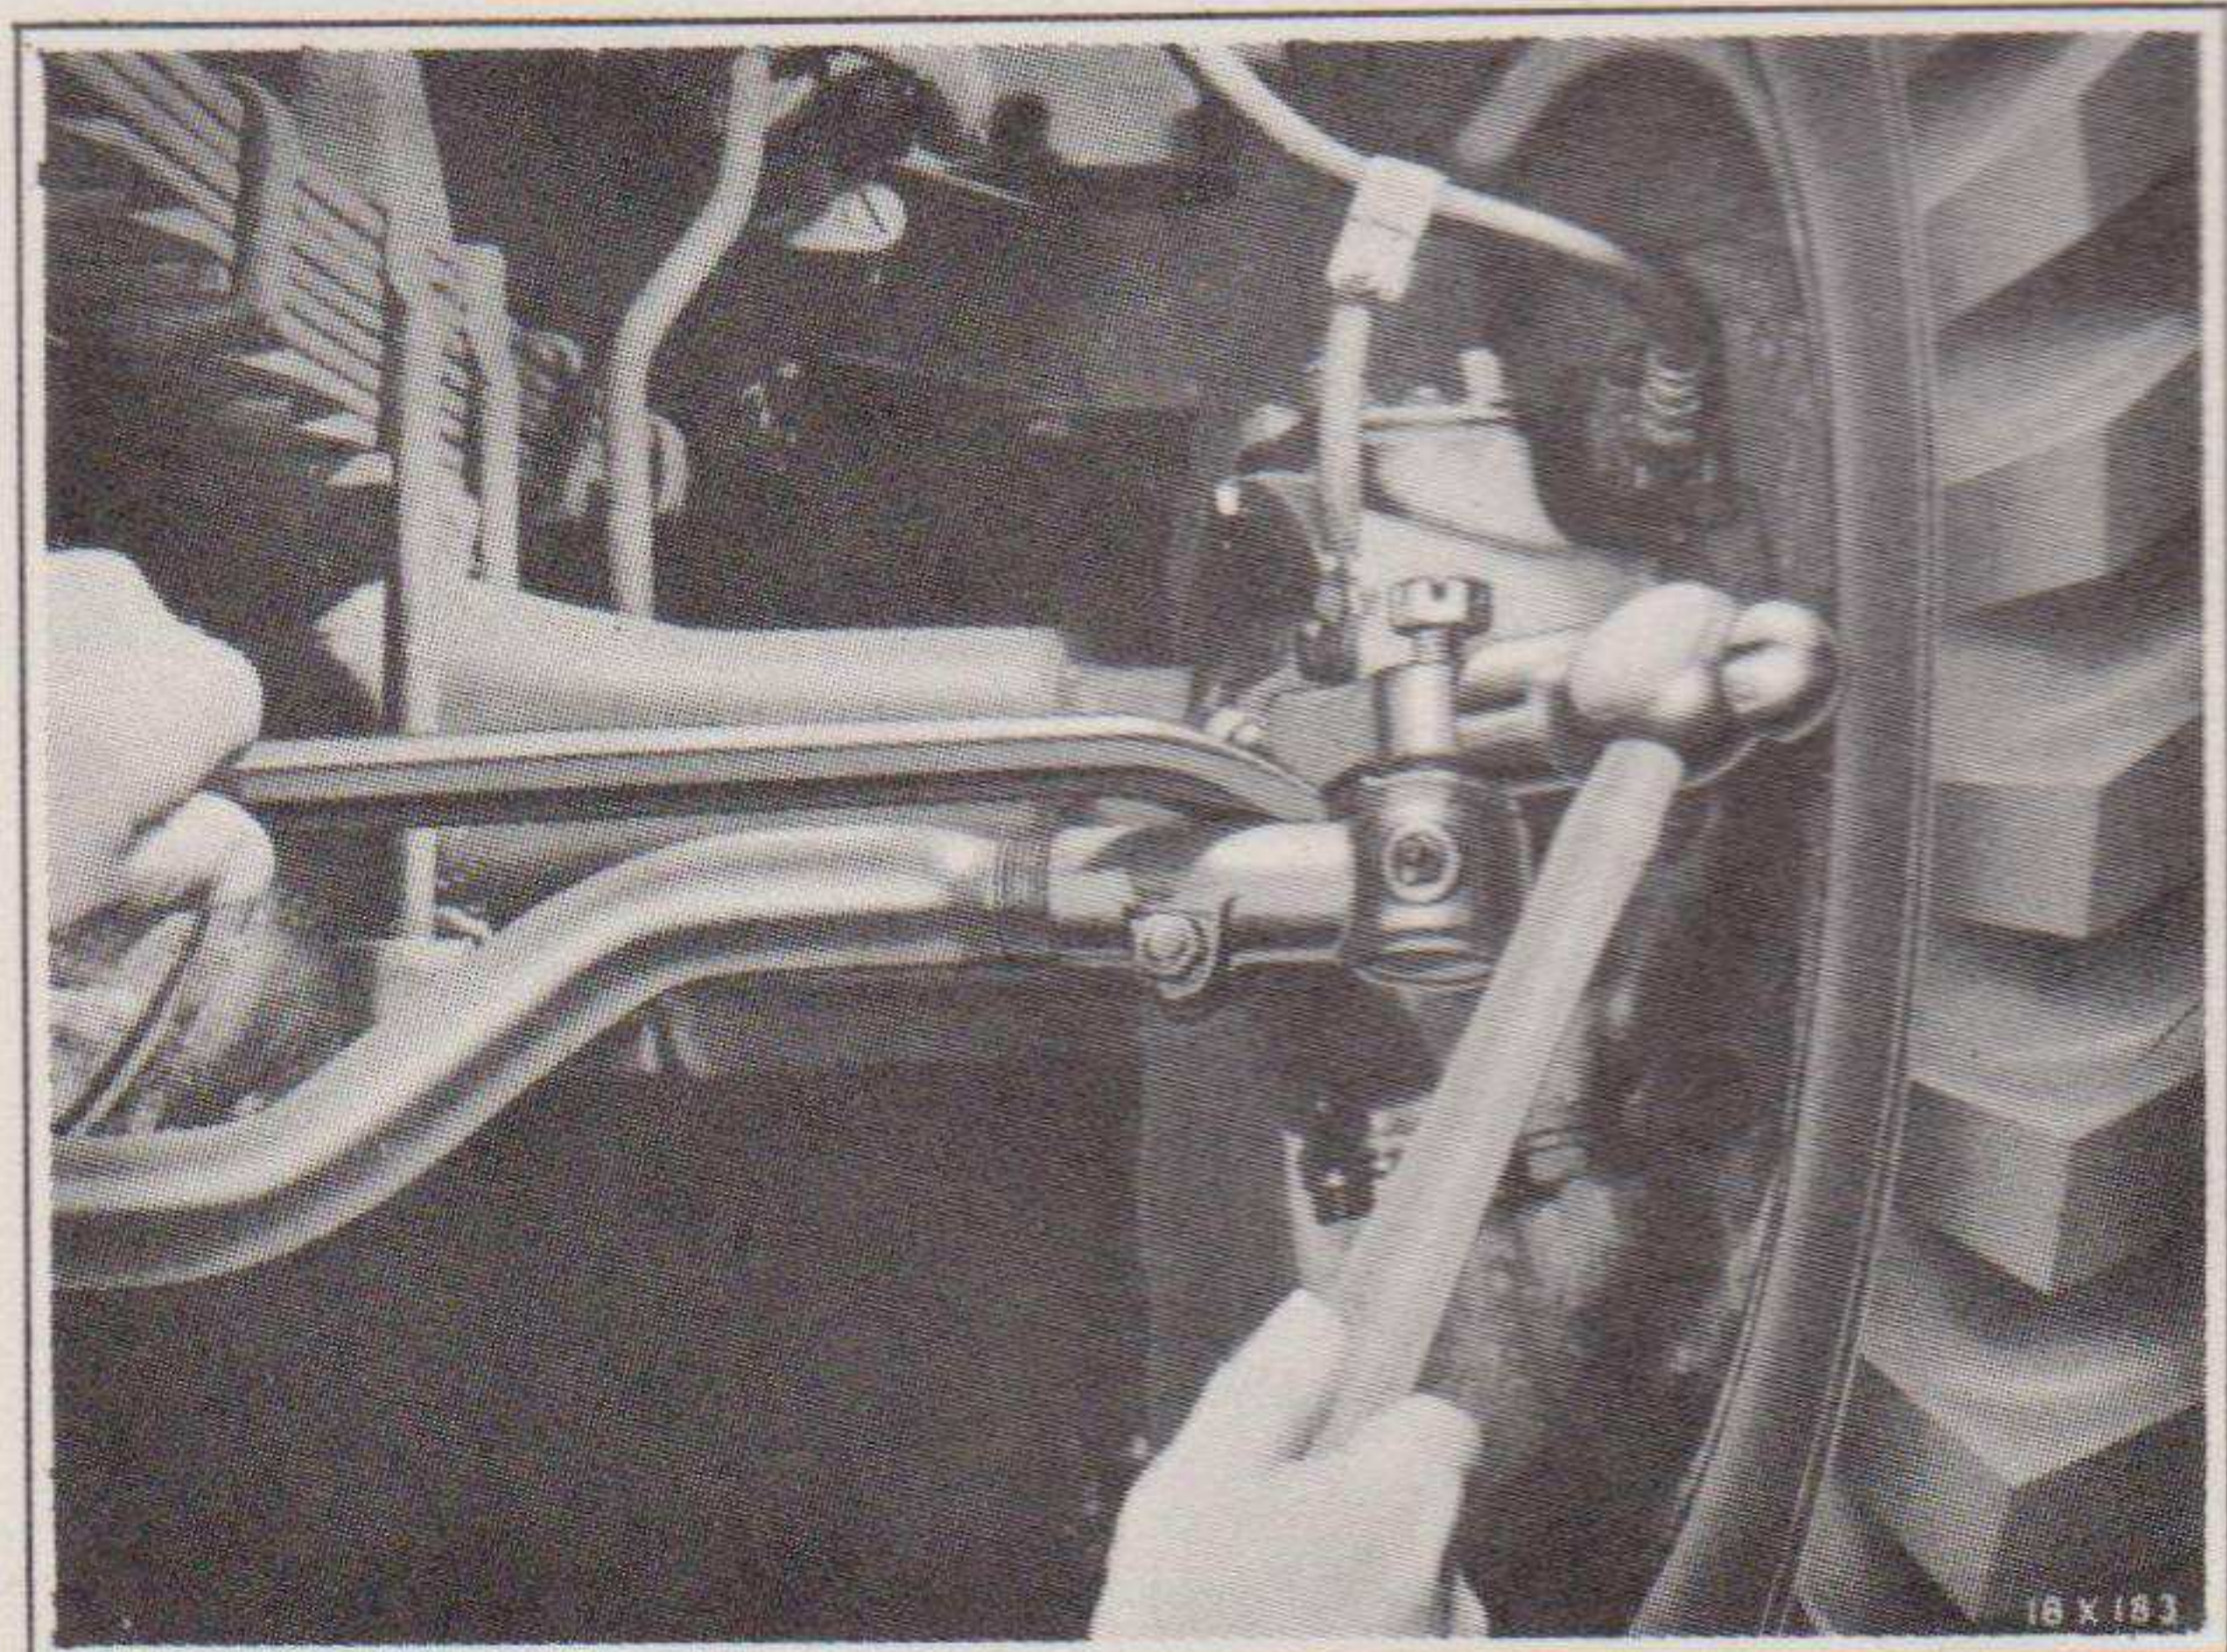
Removing Steering Tie Rod Ends from the Steering Knuckle Flange
